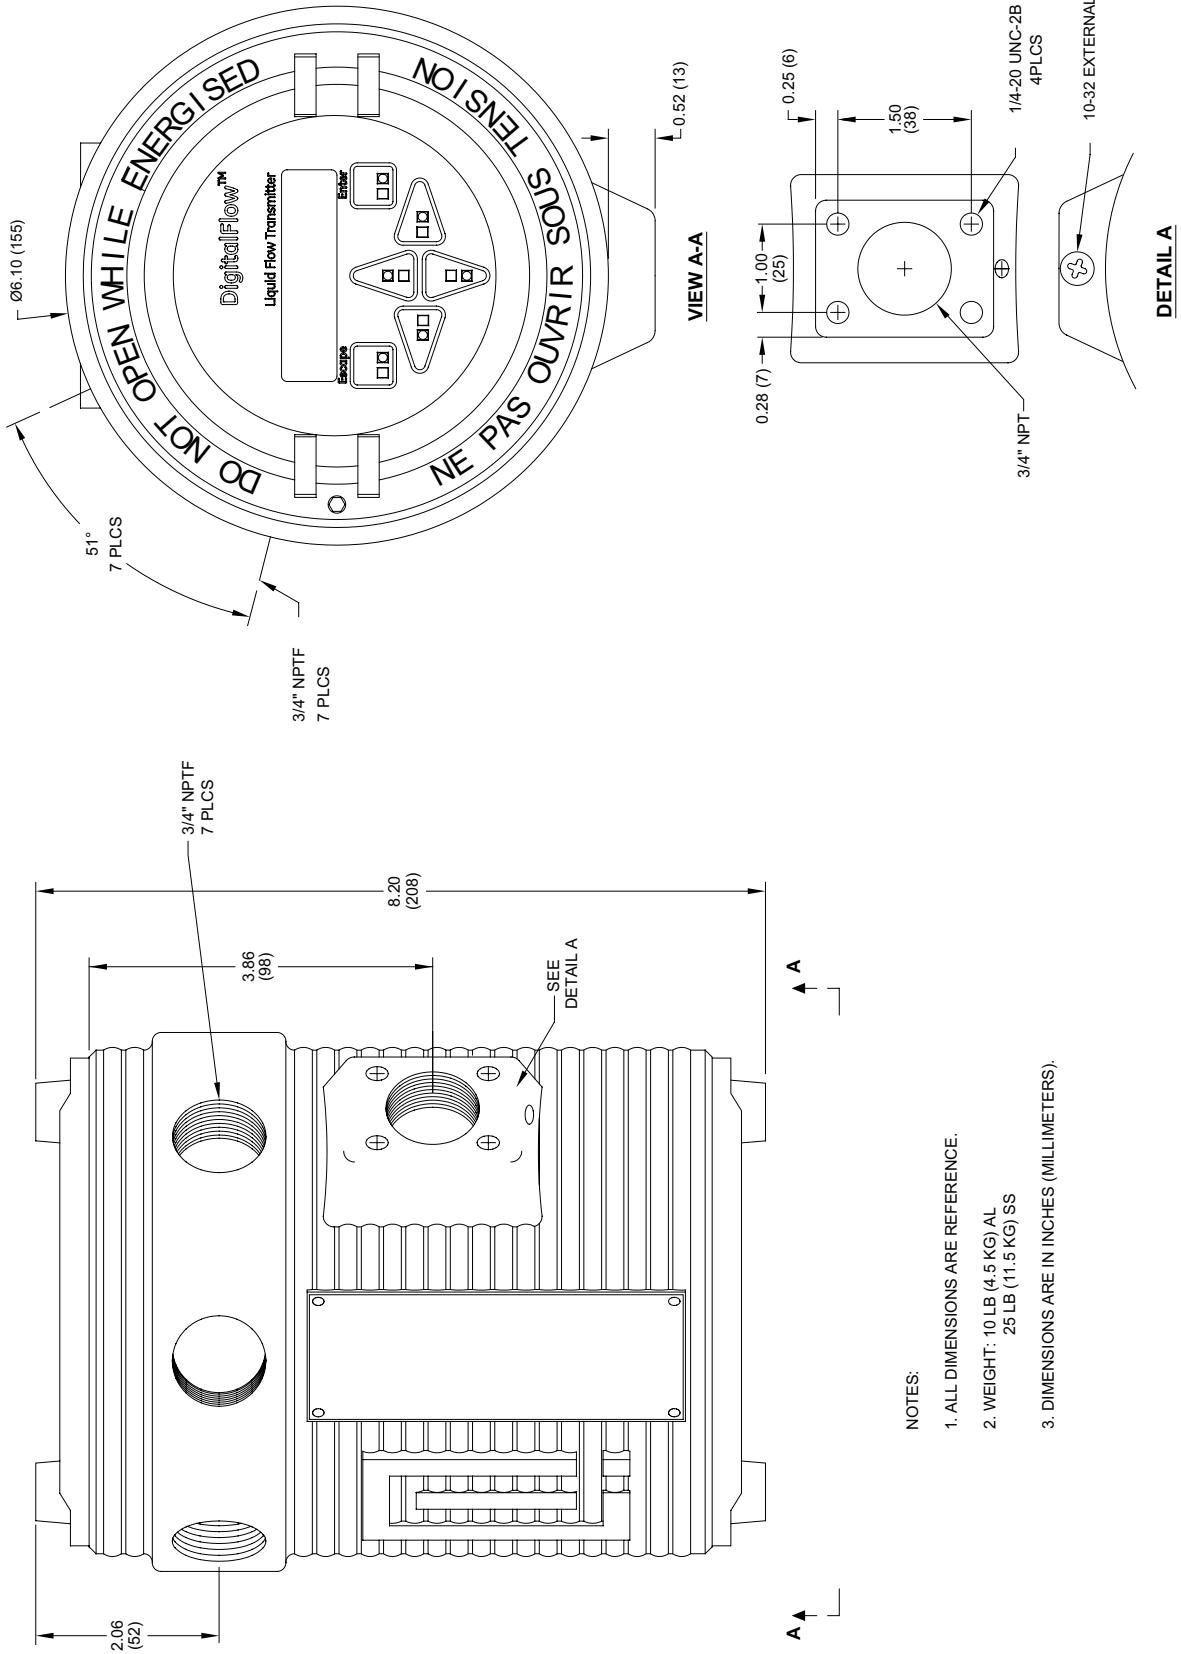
Transmitter electronics enclosure - outline and dimensions (ref. dwg. 712-1318)
